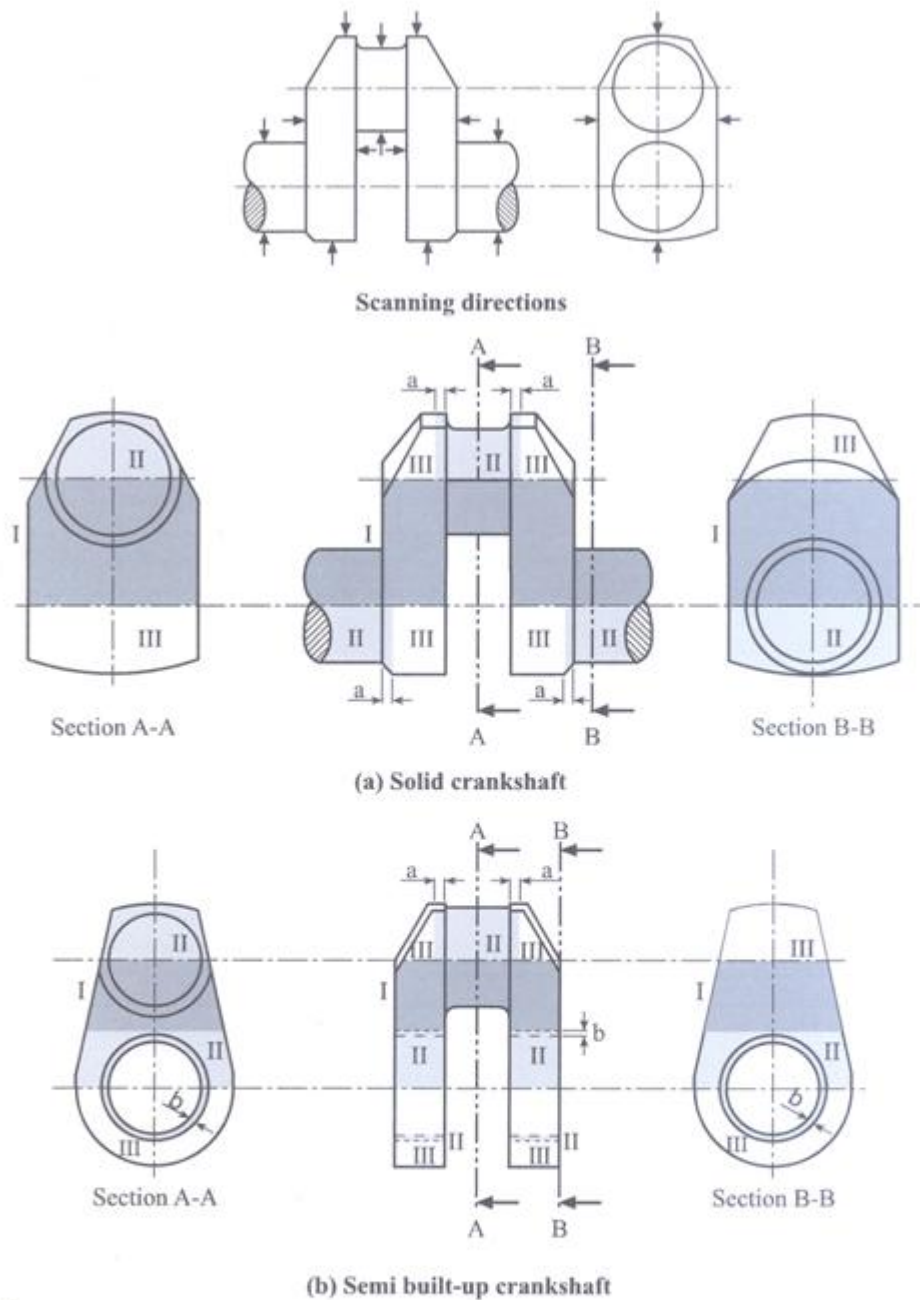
Inspection zones for ultrasonic testing of machinery components
